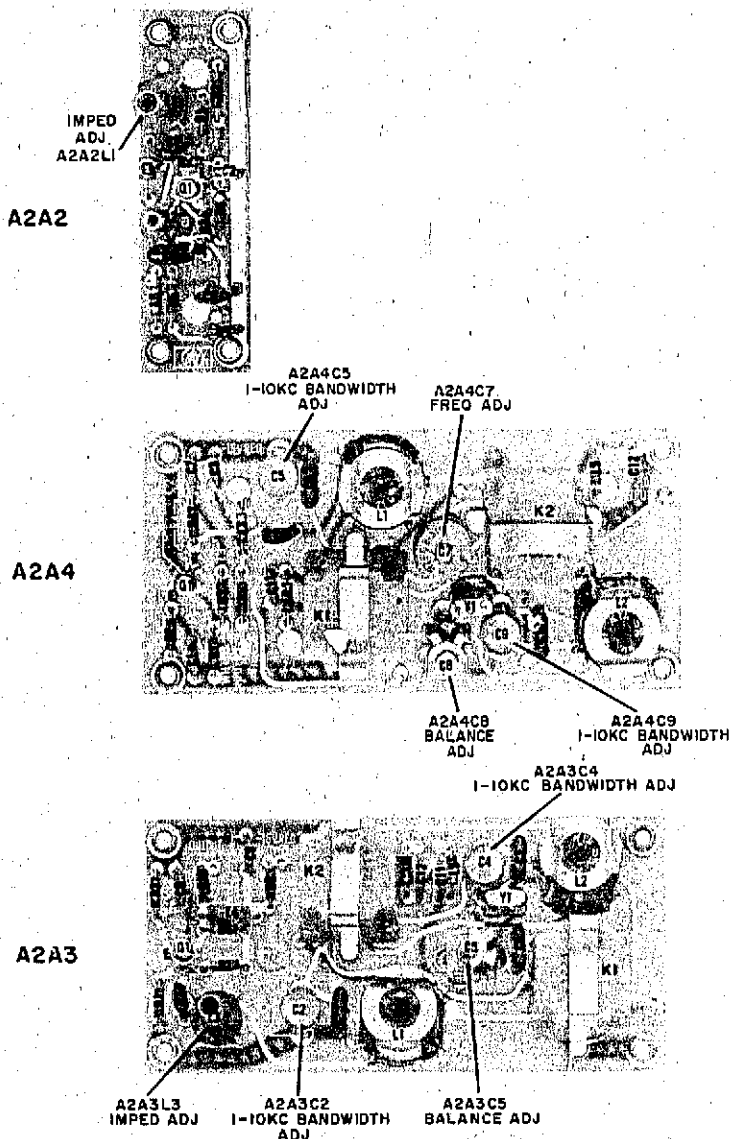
RF Circuit Assembly Boards A2A2, A2A3, A2A4
